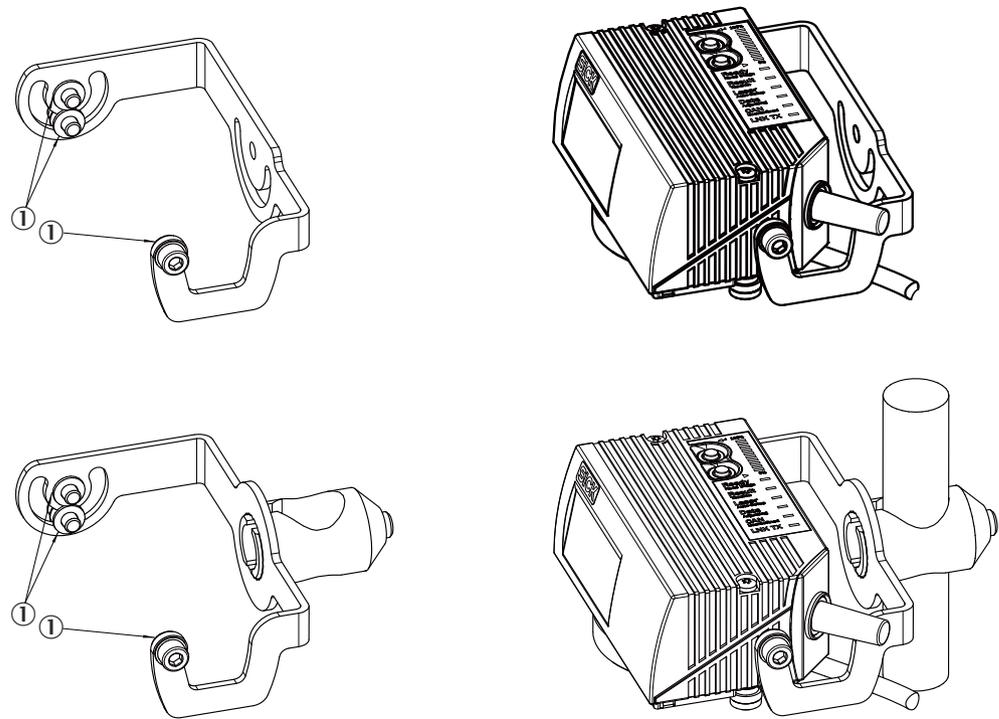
Mounting examples for device with heating: Mounting via bow-shaped mounting bracket (SICK accessories). Illustration of the device may differ.
